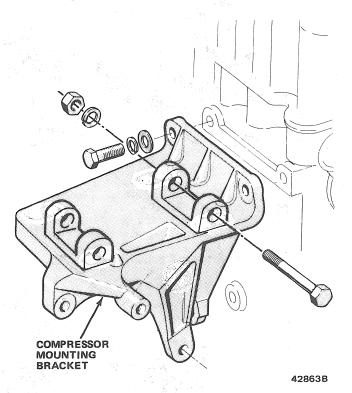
E-25 Compressor Mounting—California Six-Cylinder Engine
